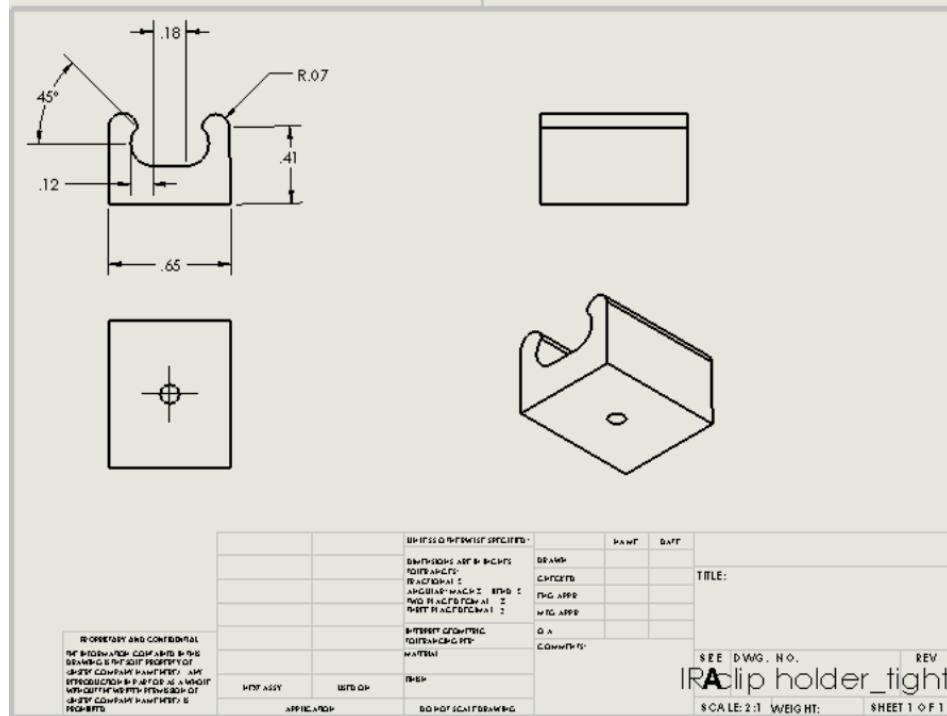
Engineering Drawing of IR Blaster Holder (in.)
